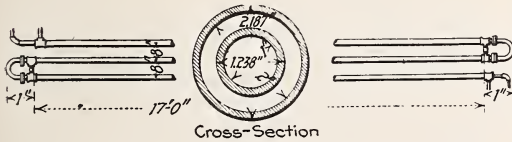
VIEW AND CROSS-SECTION OF FLAT COIL COOLER
